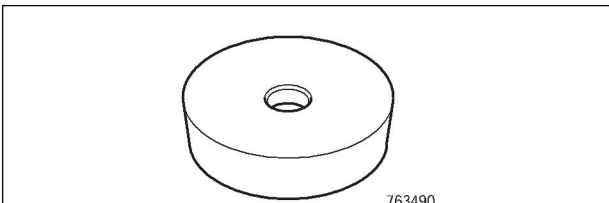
892/01158 Crankshaft Rear Oil Seal Alignment Tool
